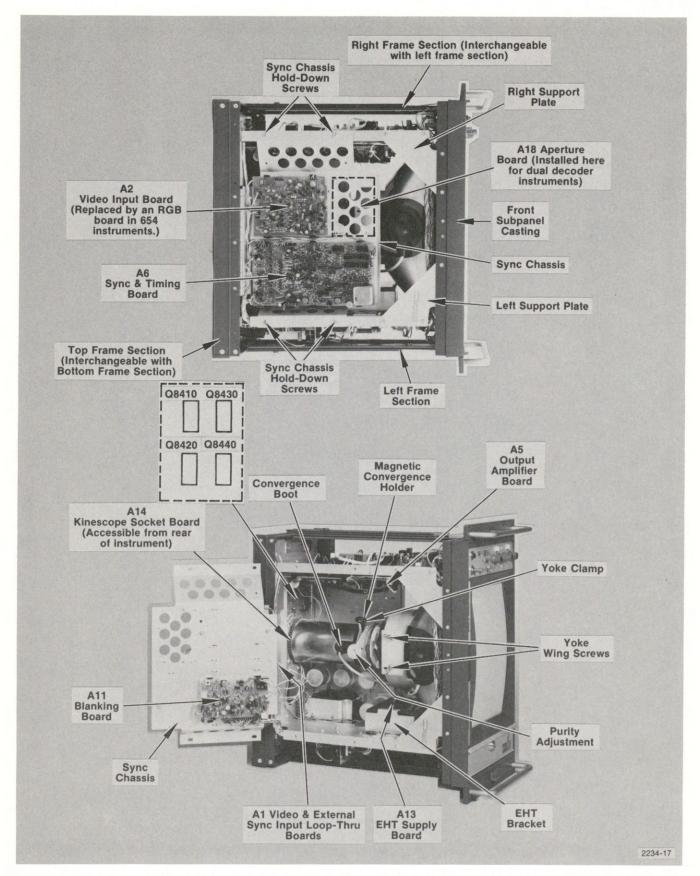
Top views showing location of the circuit boards. Some mechanical parts are identified as an aid when using the component replacement procedures.
